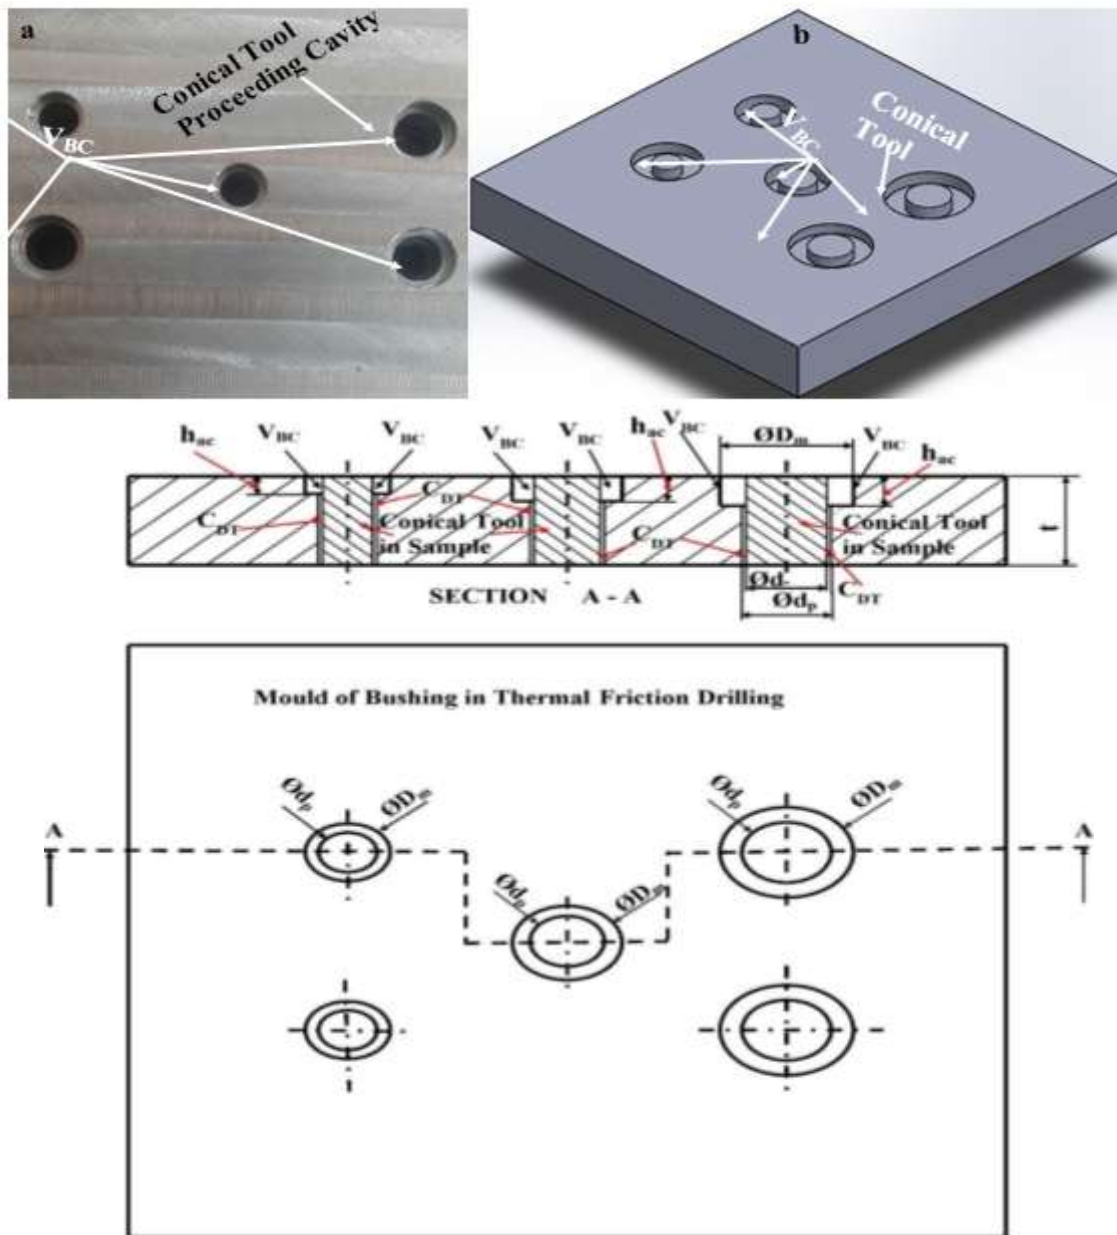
a) Manufactured mould, b) designed mould with conical tool, c) section view of mould, d) top view of the mould
